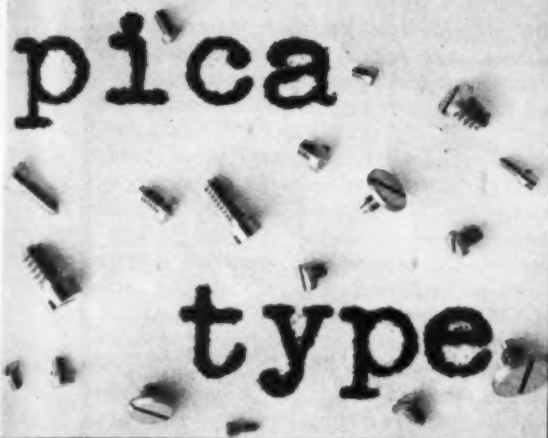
Miniature screws in relation to type size of commercial typewriter. On these special watch screws, major thread diameters range from 0.30 to 0.90 mm (0.118 to 0.0354-in.).
